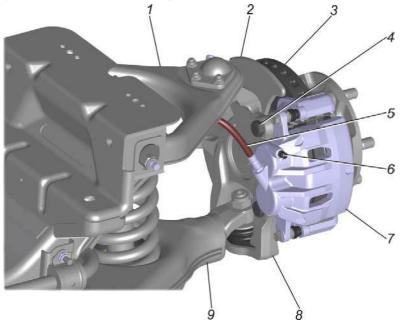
Front wheel brake installation: 1 - upper suspension arm; 2 - front brake backplate; 3 - brake disc; 4 - bolts; 5 - brake hose; 6 - bypass valve with cap; 7 - left disc brake; 8 - suspension strut; 9 - lower suspension arm
